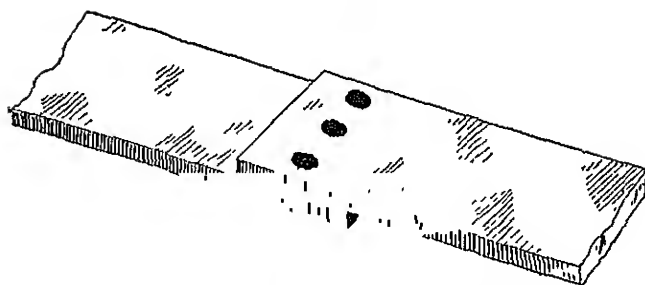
Plates "Spot Welded" by Carbon Arc.
